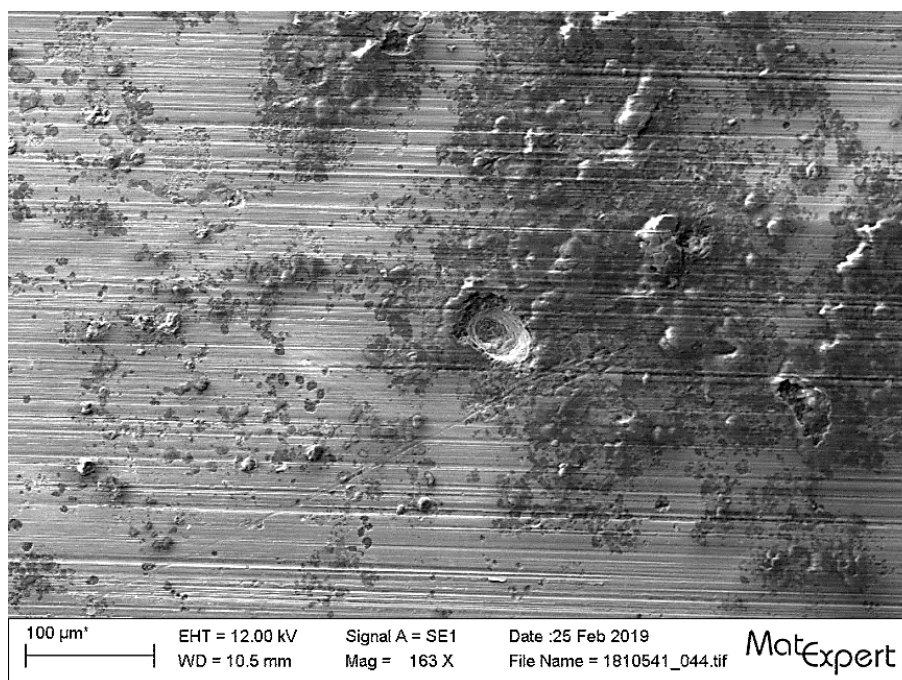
Ball bearing from the left engine, inner-race bearing track – corrosion.
